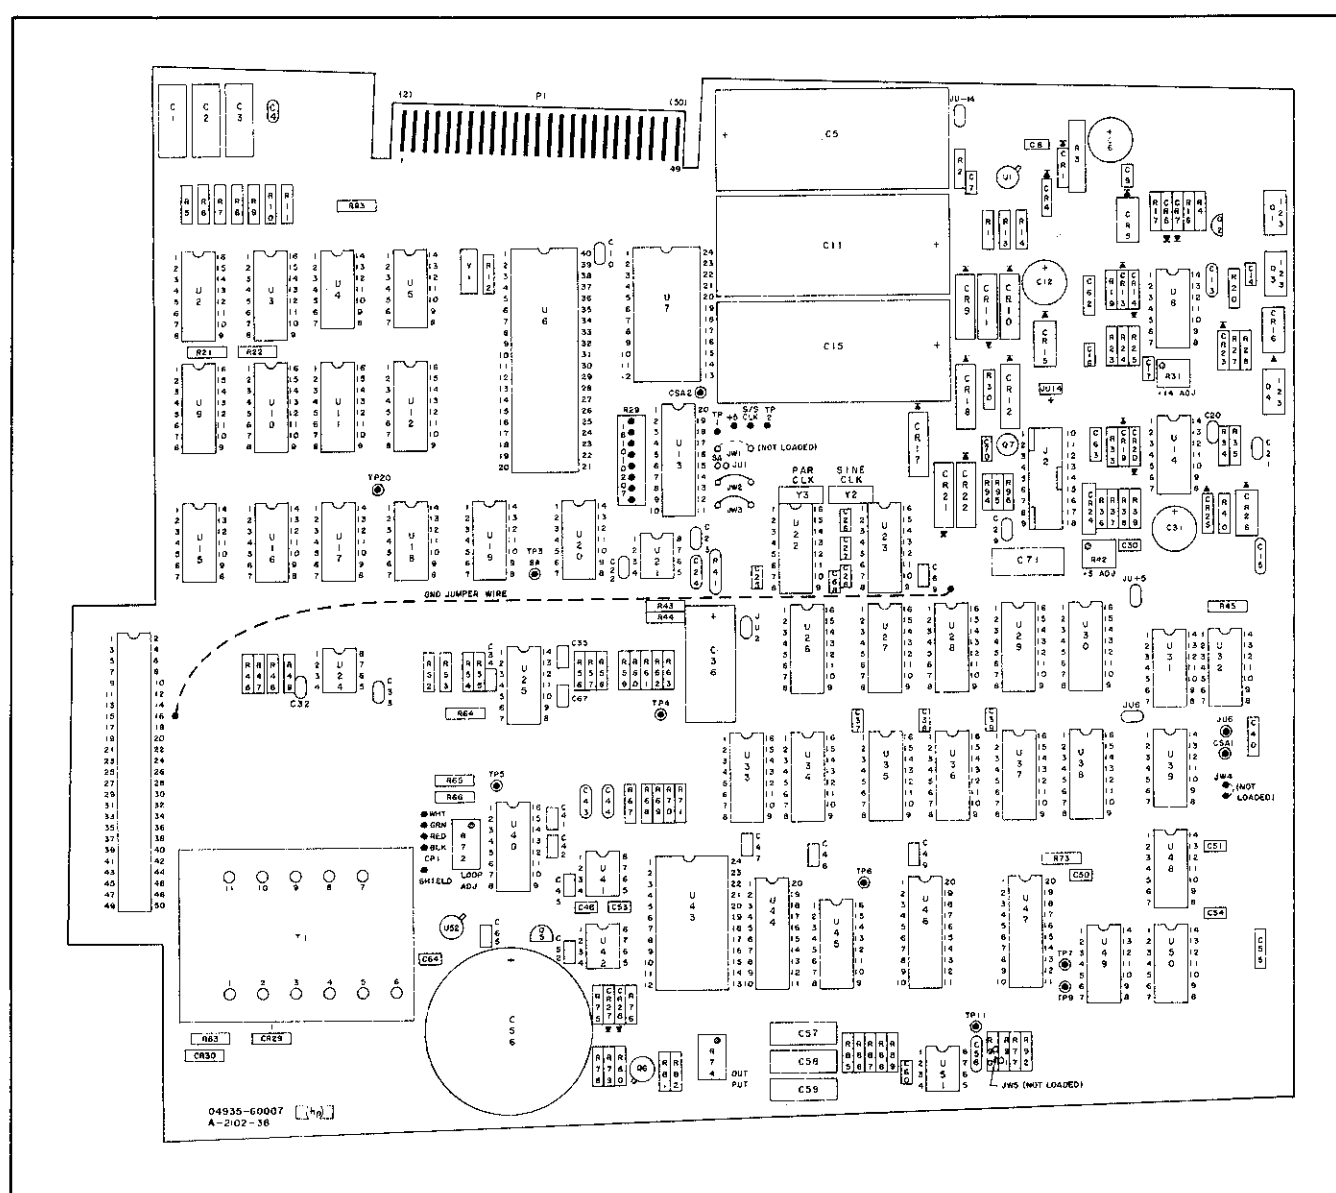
A14 P/AR Transmitter Board Component Locator
